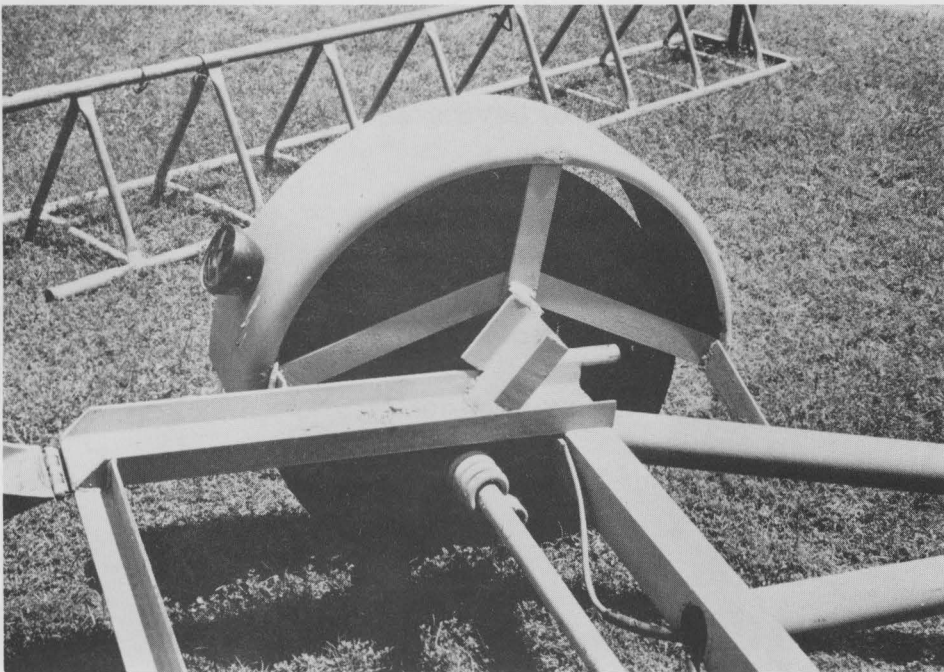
Short section of 5-inch channel welded at an angle to trailer bed prevents profilometer from rolling forward.
